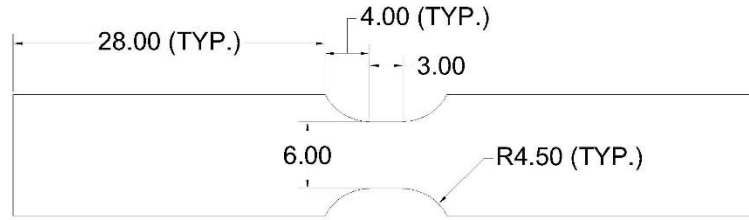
Custom dogbone shape used in fatigue tests, all dimensions in millimeters. Samples were approximately 6 mm thick.
